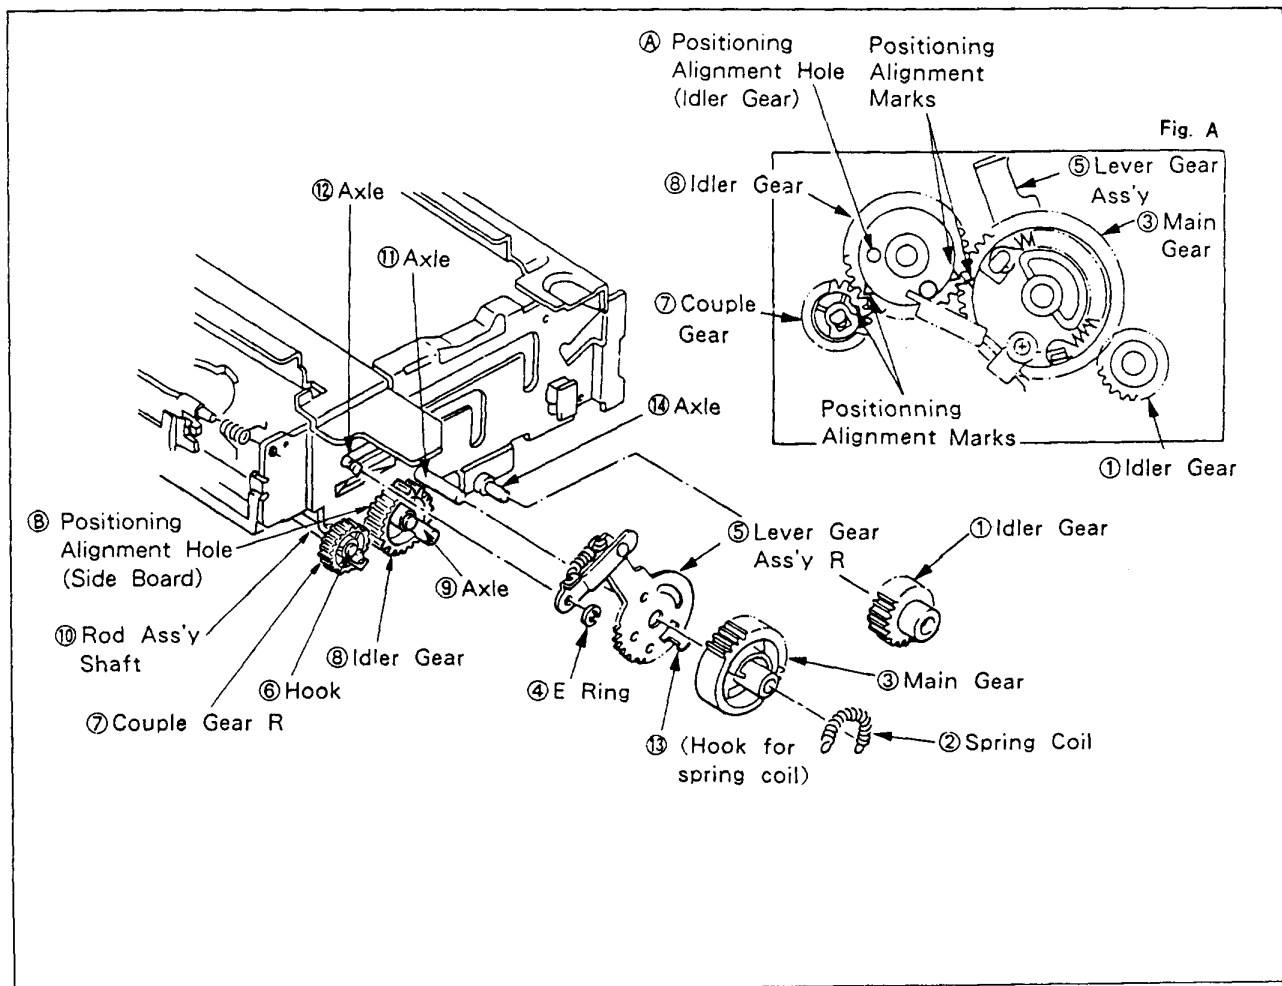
Cassette Drive Gears (Right Side)
